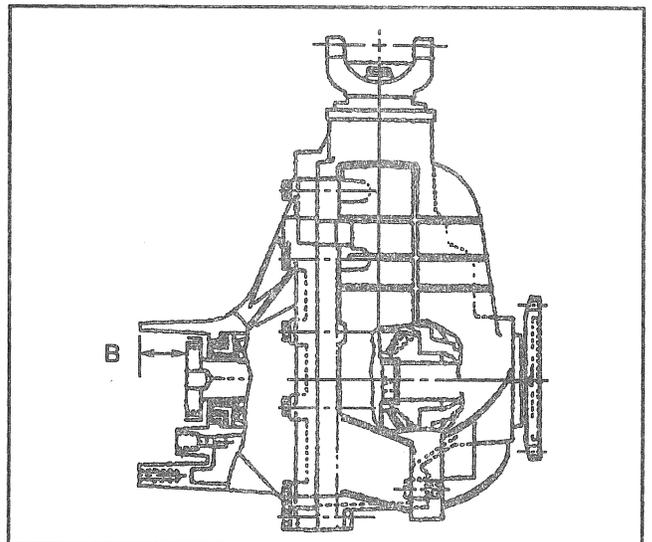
Measuring to Calculate Shim Size—Carrier Case
